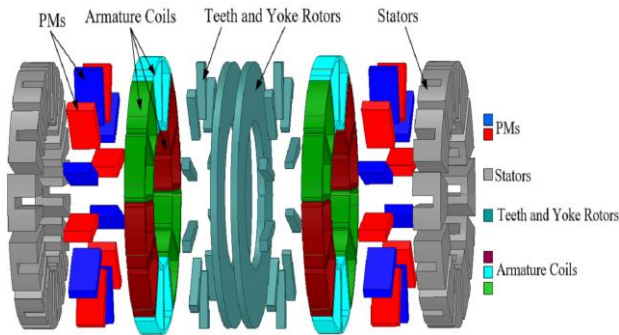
The 3D exploded view of internal dual-rotor DS-AFFSPM motor
